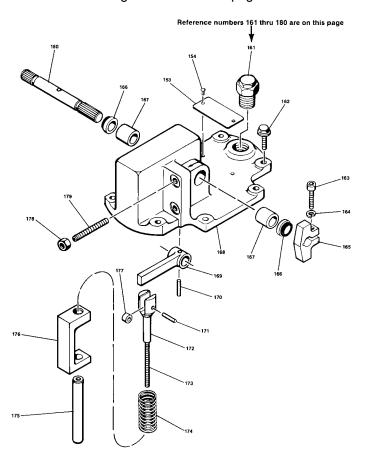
Parts for the TG-13 and -17 Cover Assembly (Lever Speed Setting), for Use with Aluminum Case TG-13 and -17
